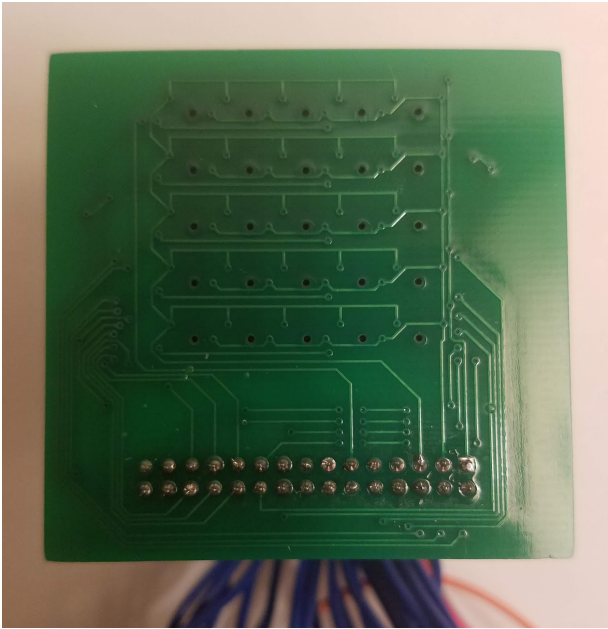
A picture of the front of the assembled circuit board. The small holes arranged in a grid are the ports for the microphones.
